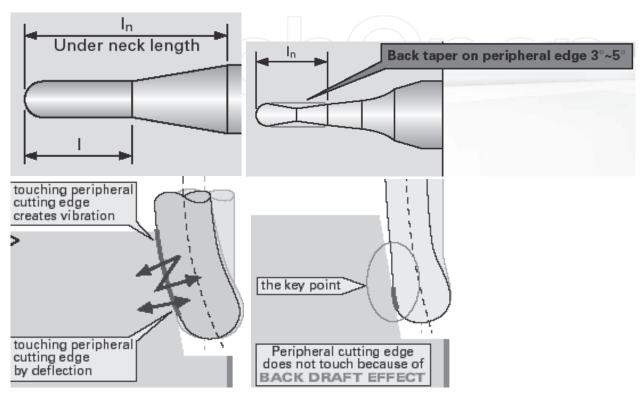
Comparison of different tool shapes. Left: Conventional design. Right: Design adapted for micro milling [Hte\_Ep1].
